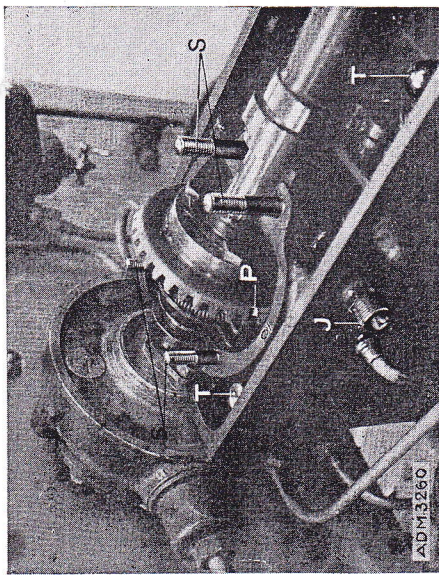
LIFTING THE CYLINDER HEAD (3).
